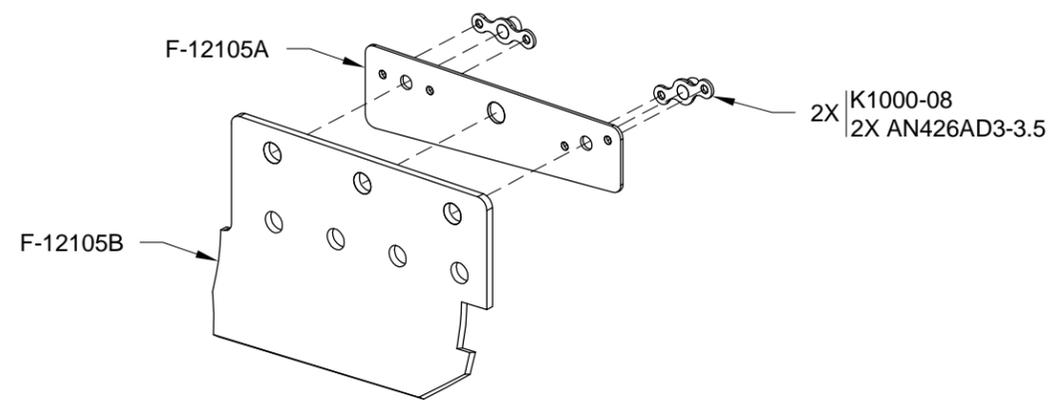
TOP LEFT MAIN GEAR SEAL ASSEMBLY
